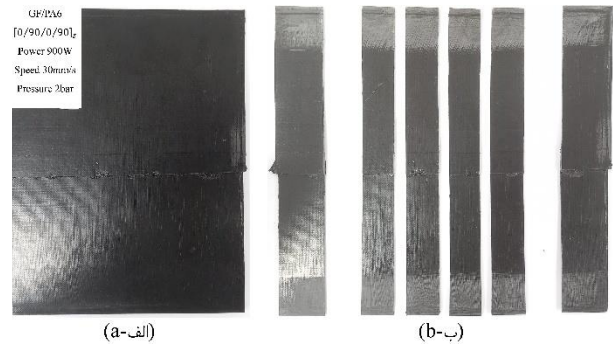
(a): Welded (GF/PA6) composite plates. (b): Cutting the welded plates perpendicular to the weld line.
